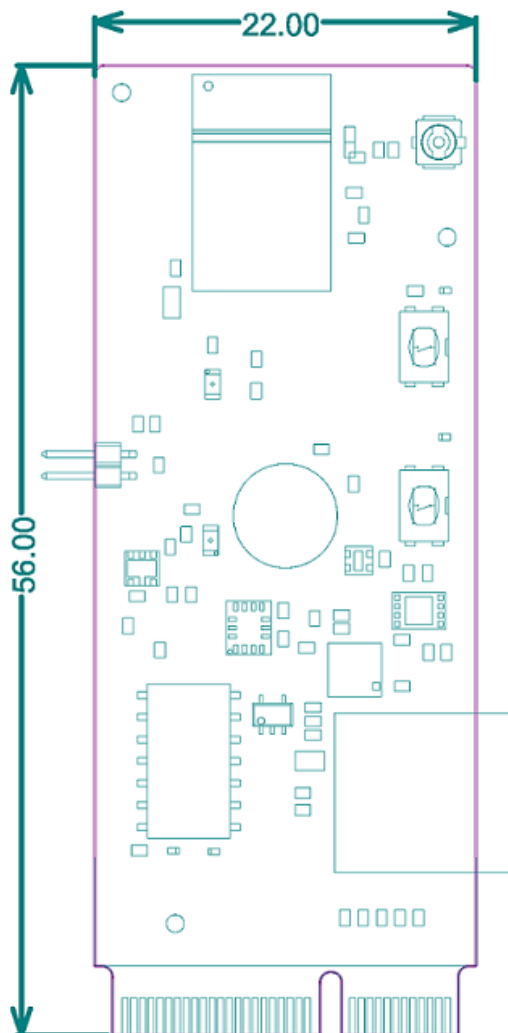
B-WBA5M-WPAN PCB layout bottom side
